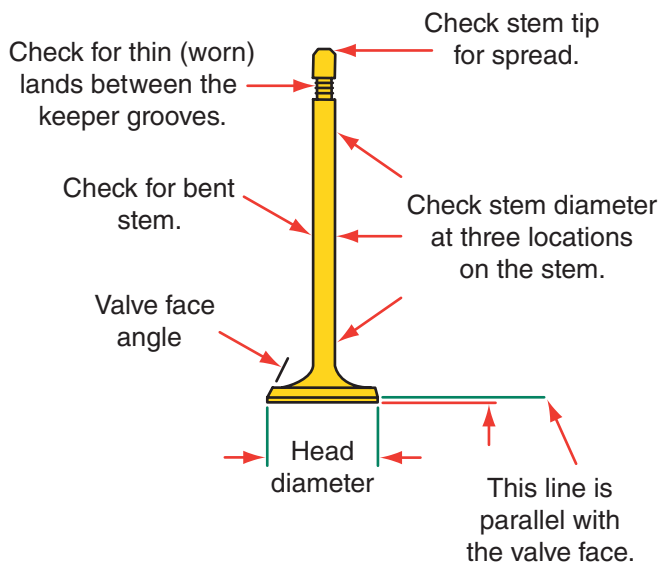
Parts of a valve that should be checked during your inspection.
